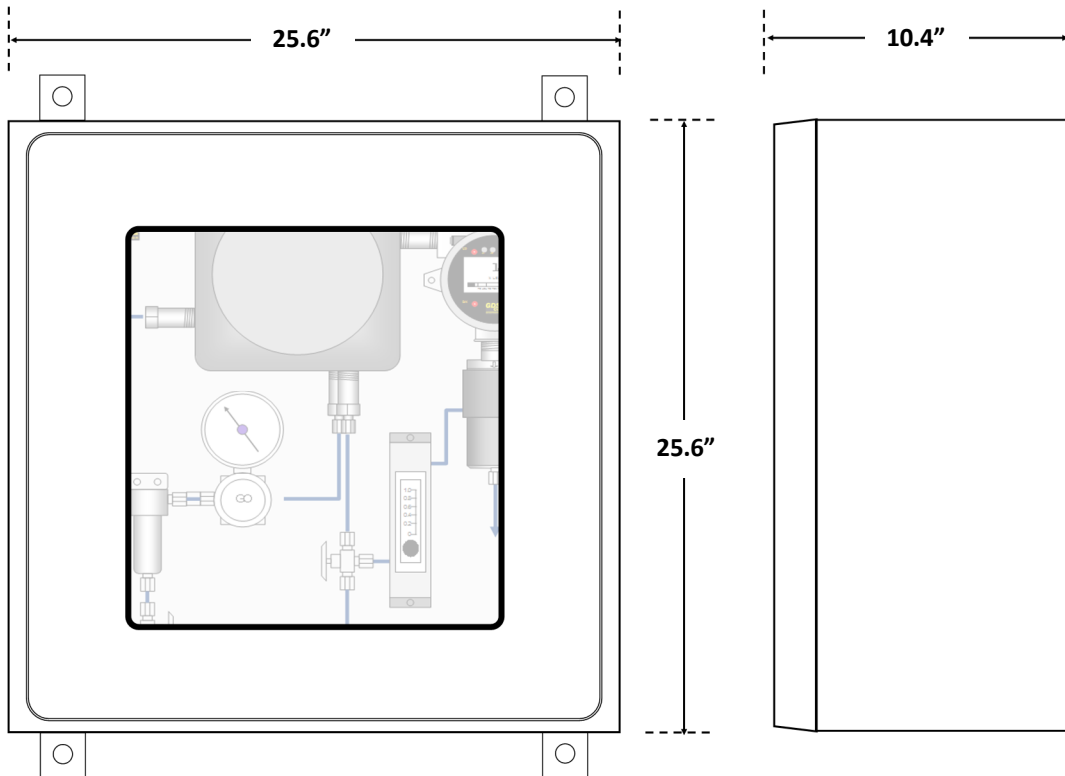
GDS-68XP Dimensions (NEMA 4X Enclosure)
